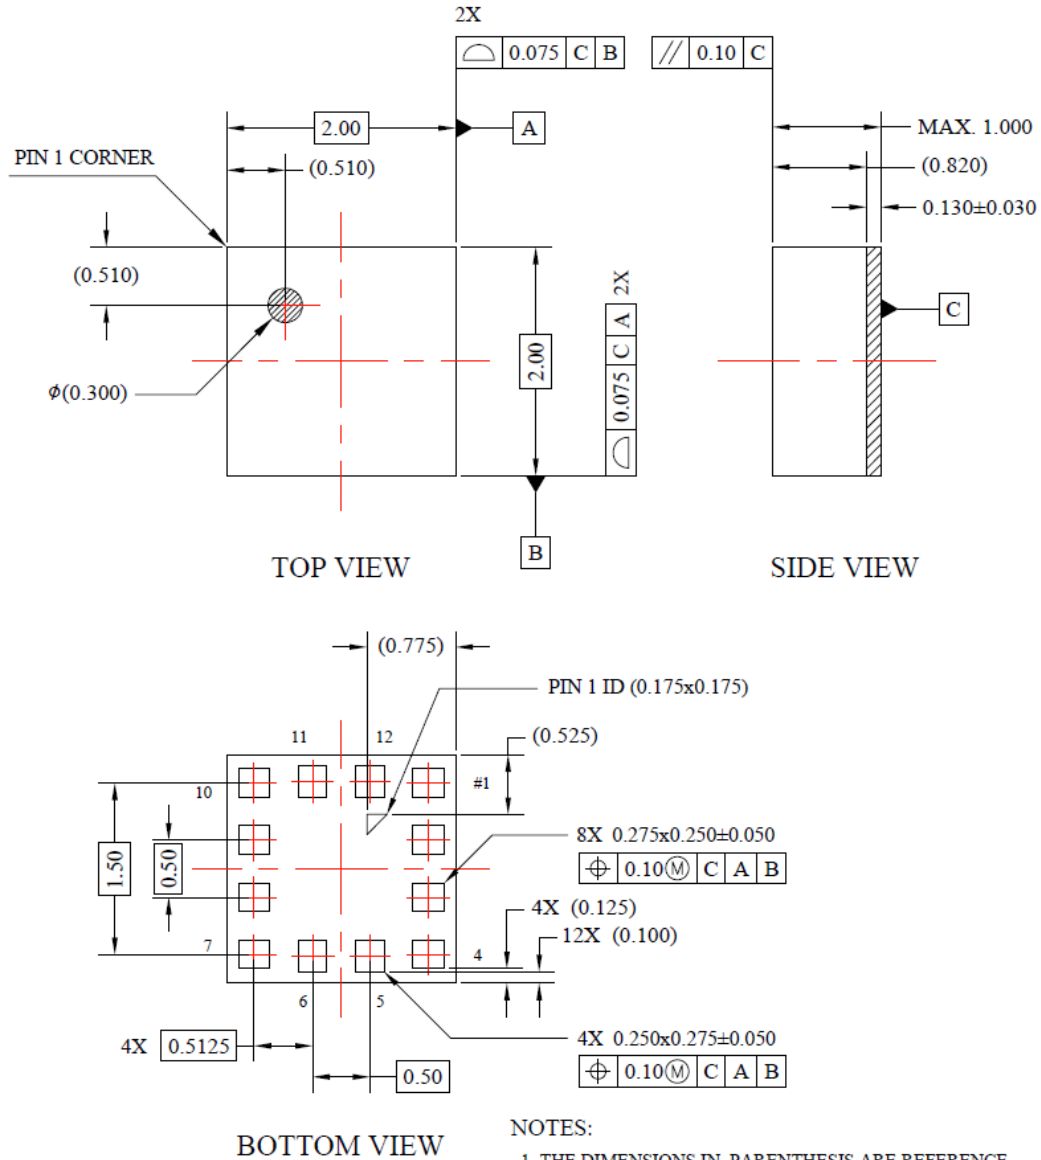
12-pin 2 x 2 mm LGA package outline diagram with dimensions.
